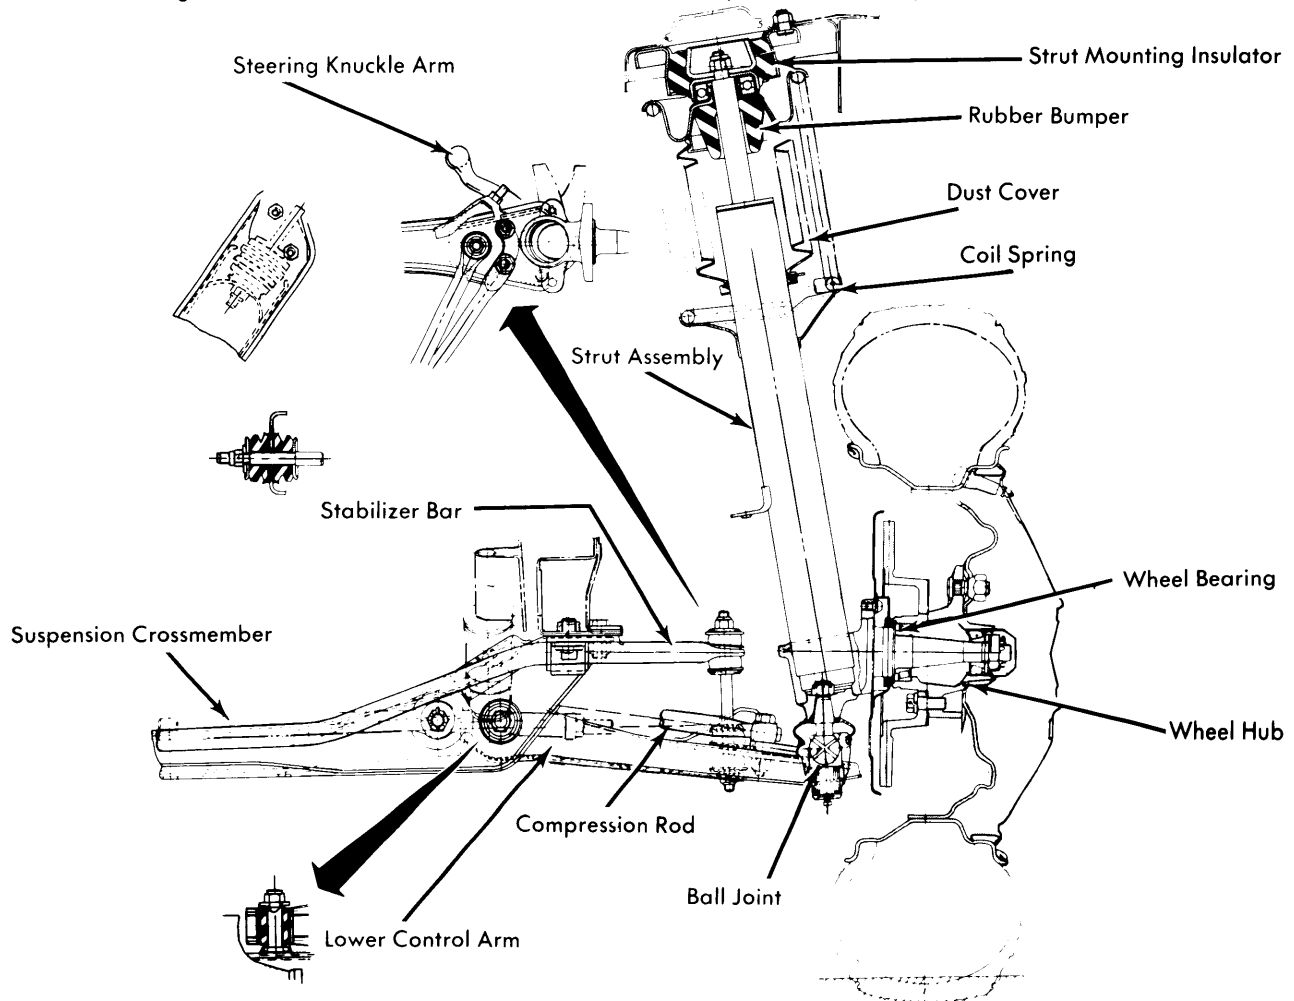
Front Suspension Assembly Including Small Detailed Views
